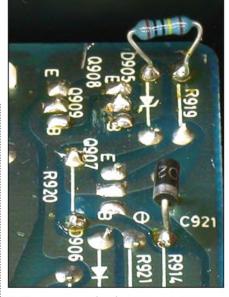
Delay-circuit mod components D916 and R922 are soldered to the bottom of the Adcom PC board.
